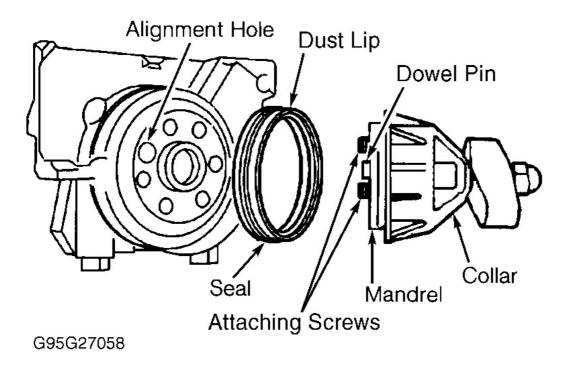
Installing Rear Crankshaft Seal Courtesy of GENERAL MOTORS CORP.
